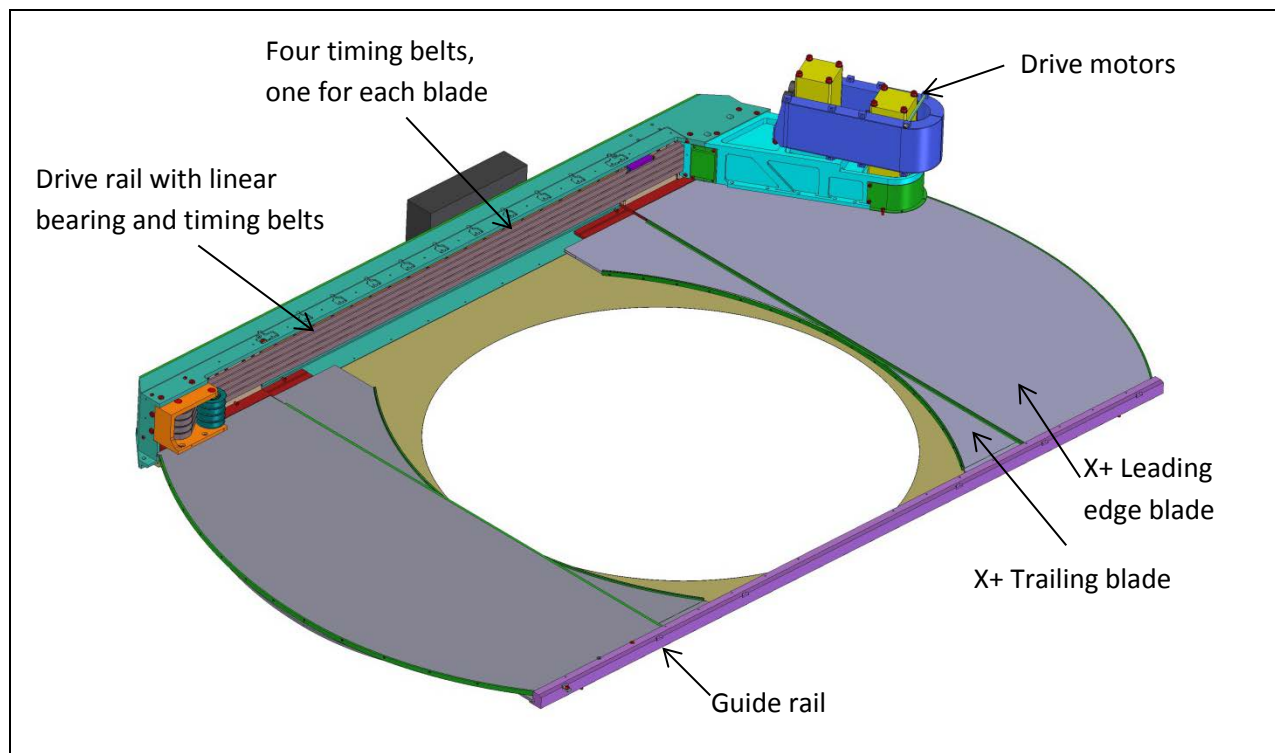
Shutter assembly with Z- garage plate and cover removed to show drive system components
